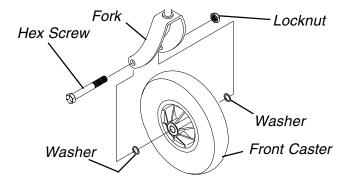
INSTALLING/REPLACING FRONT CASTERS
